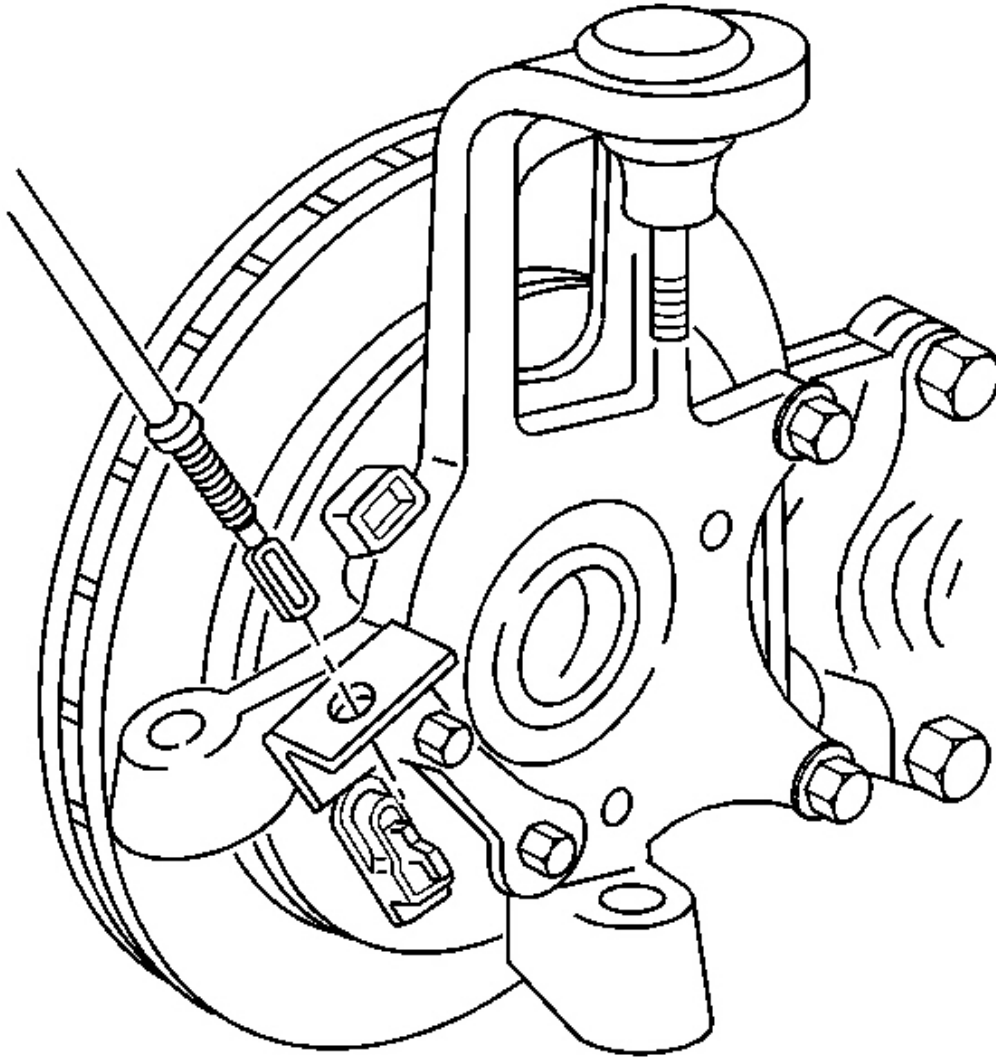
Rear Park Brake Cable To Rear Suspension Mounting Bracket
